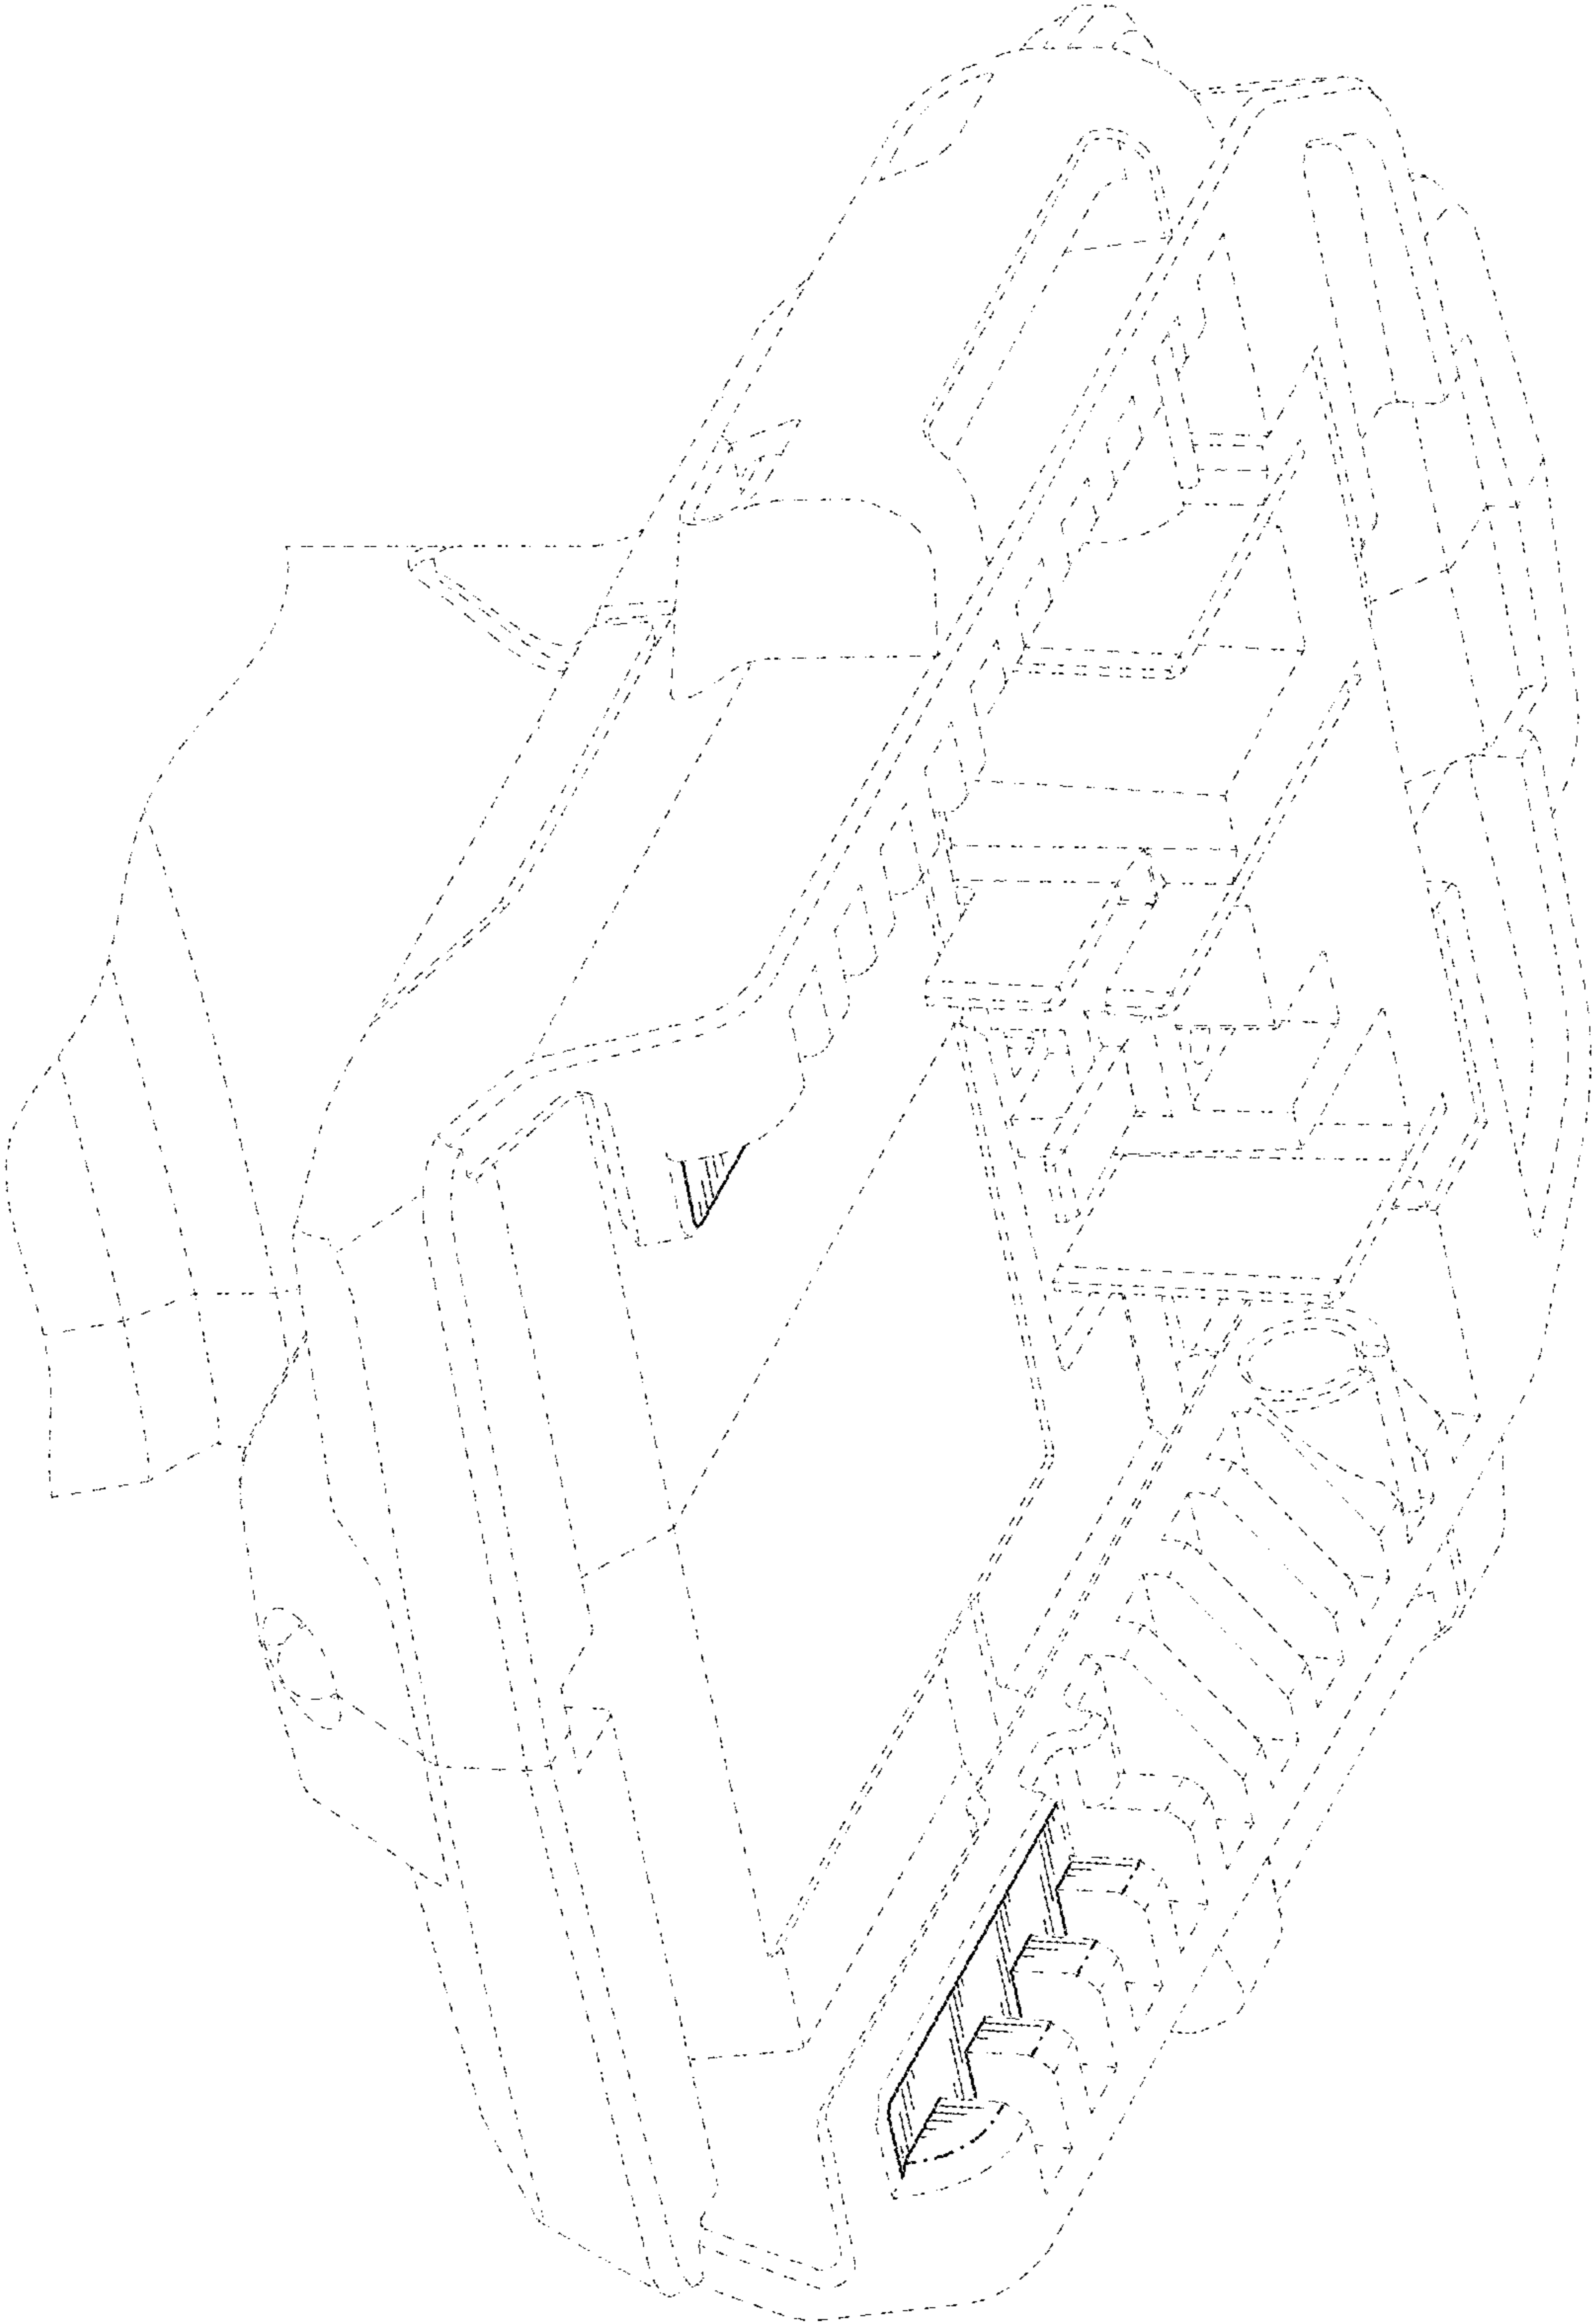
is a bottom view of the interface of power tool shown in FIG. 1.
